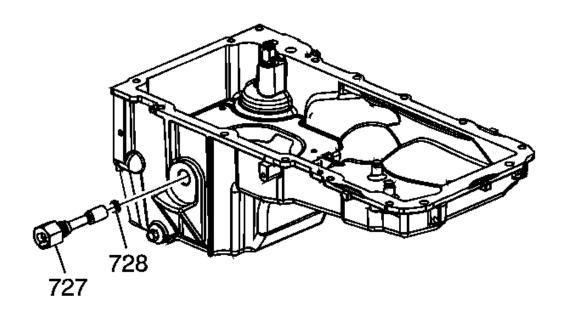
View Of Oil Level Sensor & O-Ring Courtesy of GENERAL MOTORS CORP.
